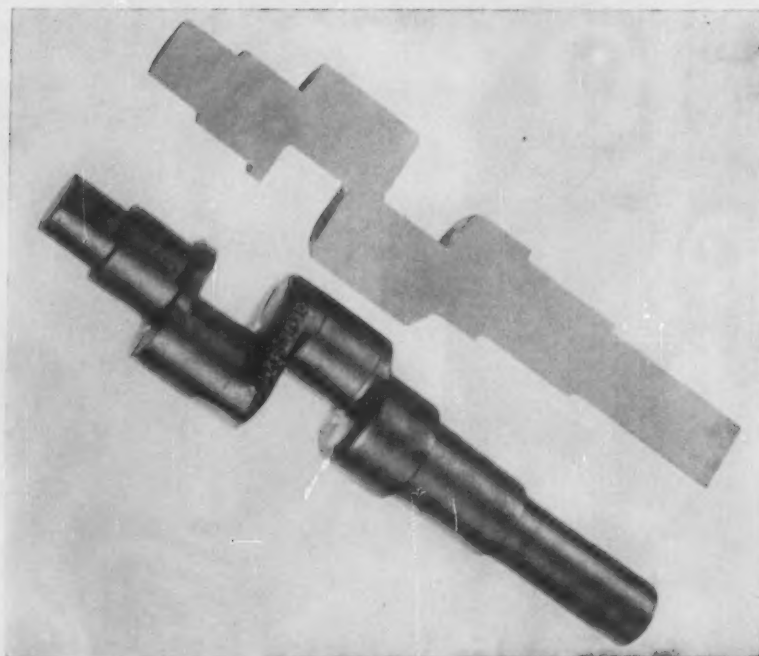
Cast crankshaft offers broader latitude at lower final cost.
